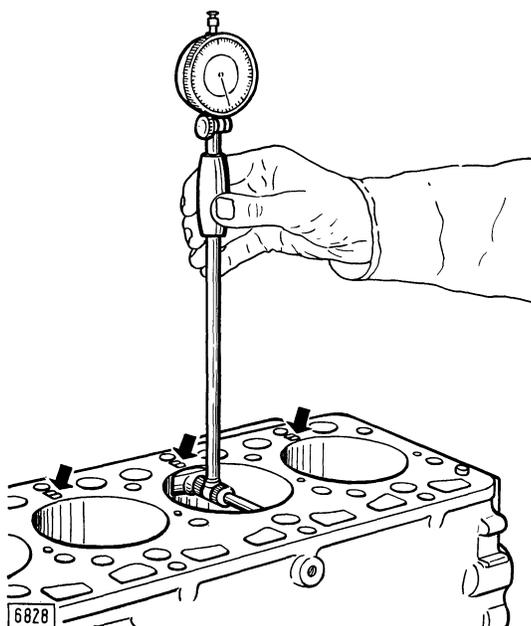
Checking Cylinder Liner I.D. using a Dial Gauge
